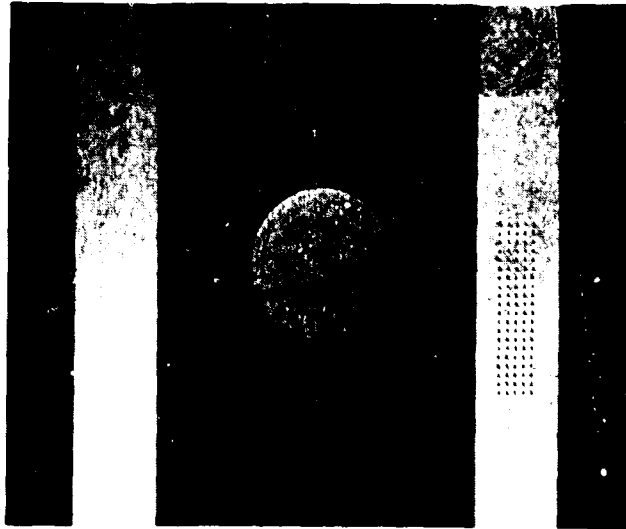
Typical Strip Bending Specimen with 5-Mil Diameter Holes Produced by the ECID Process. Hole Exit Surface is shown at Left and in the Center and Hole Entrance is shown at Right
